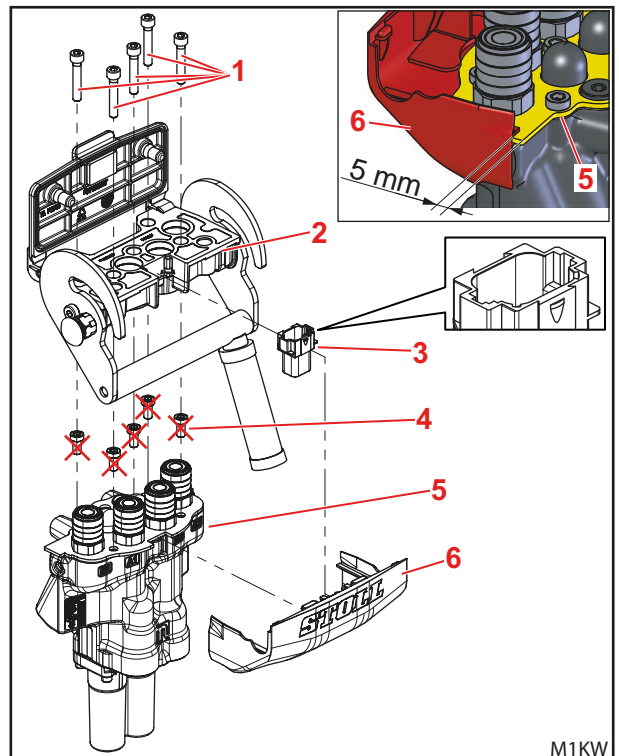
Installing the Hydro-Fix lower part on Hydac valves (with integrated electrical interface)
